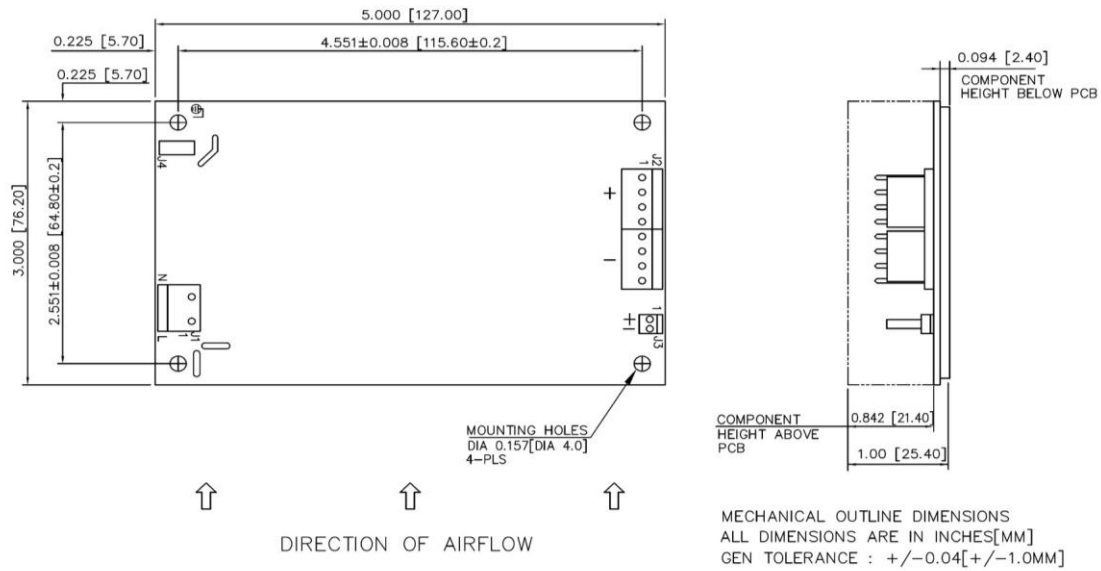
Mechanical Drawing - Molex Header (Option 2)
